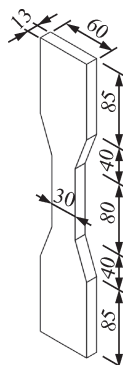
Dimensions of the dog bone-shaped specimen (unit: mm)
